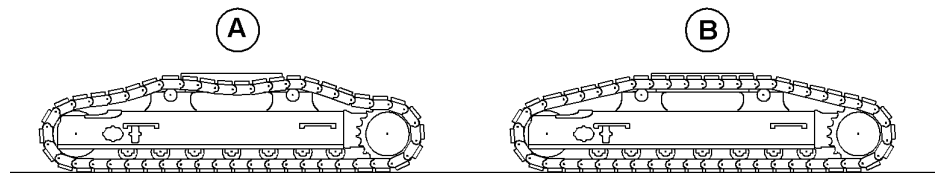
Crawler when insufficiently (A) and correctly (B) tensioned.
